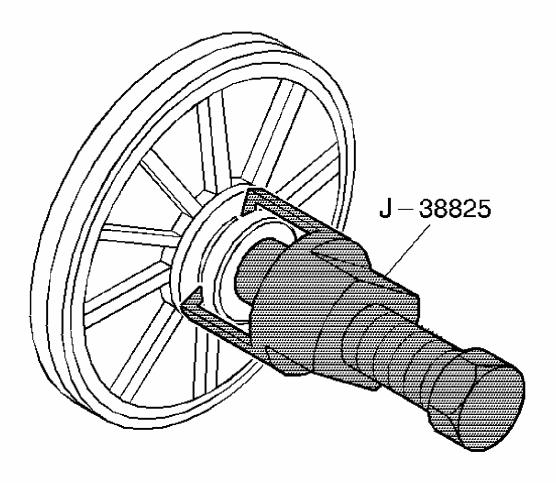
View of J 38825 Courtesy of GENERAL MOTORS CORP.
